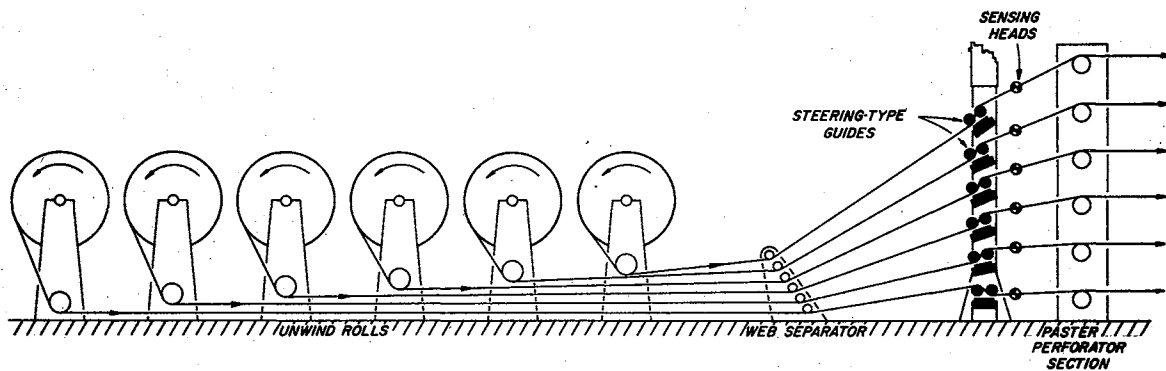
Steering Guides for Guiding into Multi-Wall Bag Machine.
